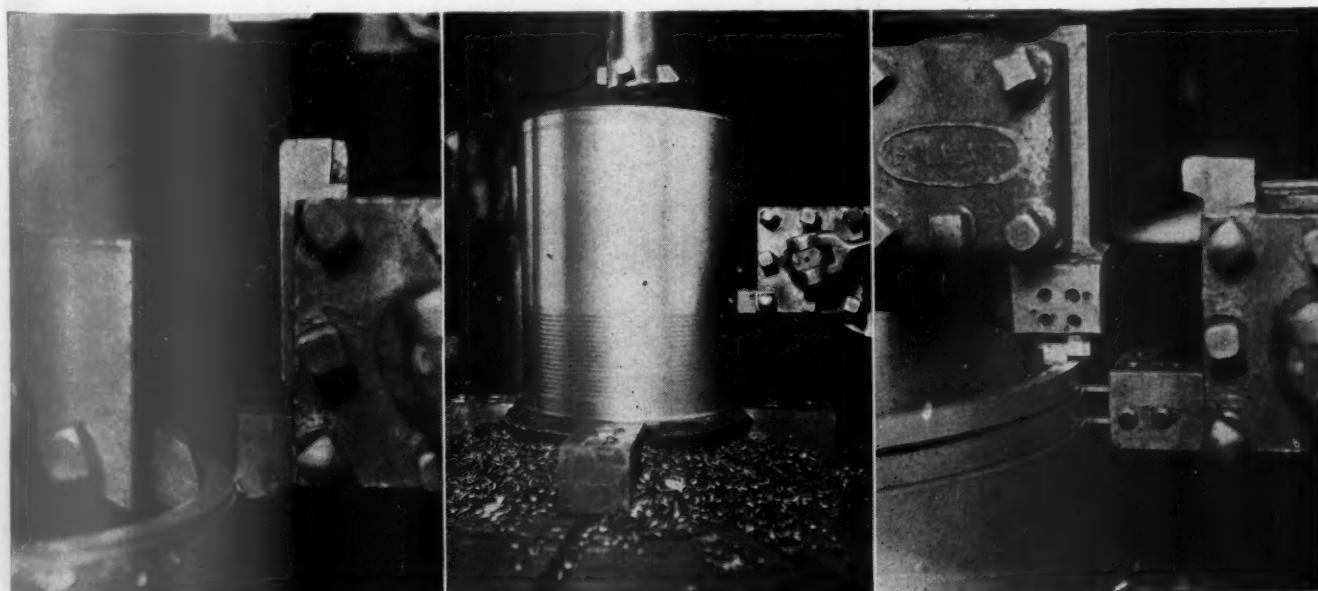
Left: First operation, rough boring and turning the pot—Center: Second operation, finishing the outside of the pot—Right: Third operation; facing, recessing and parting the valve rings
